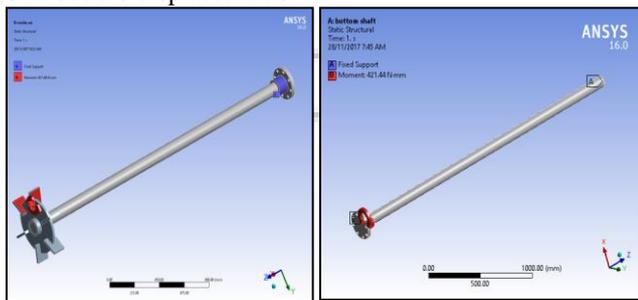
Bottom Shaft Fig. 4.5: Rushton Impeller
